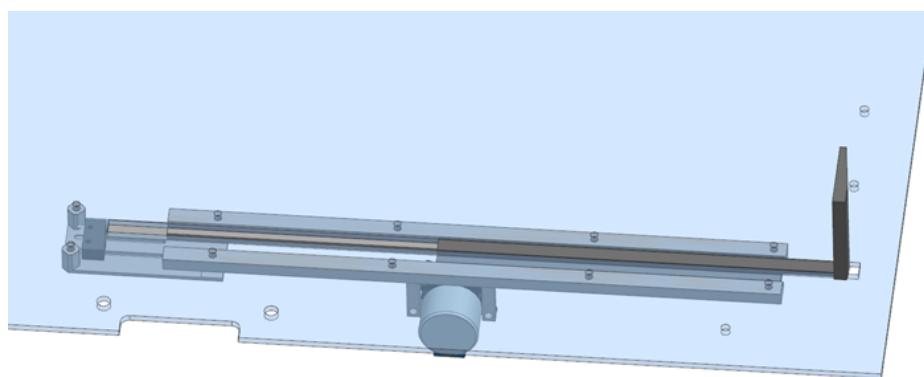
Finalized paper adjustment assembly (Siemens NX)
